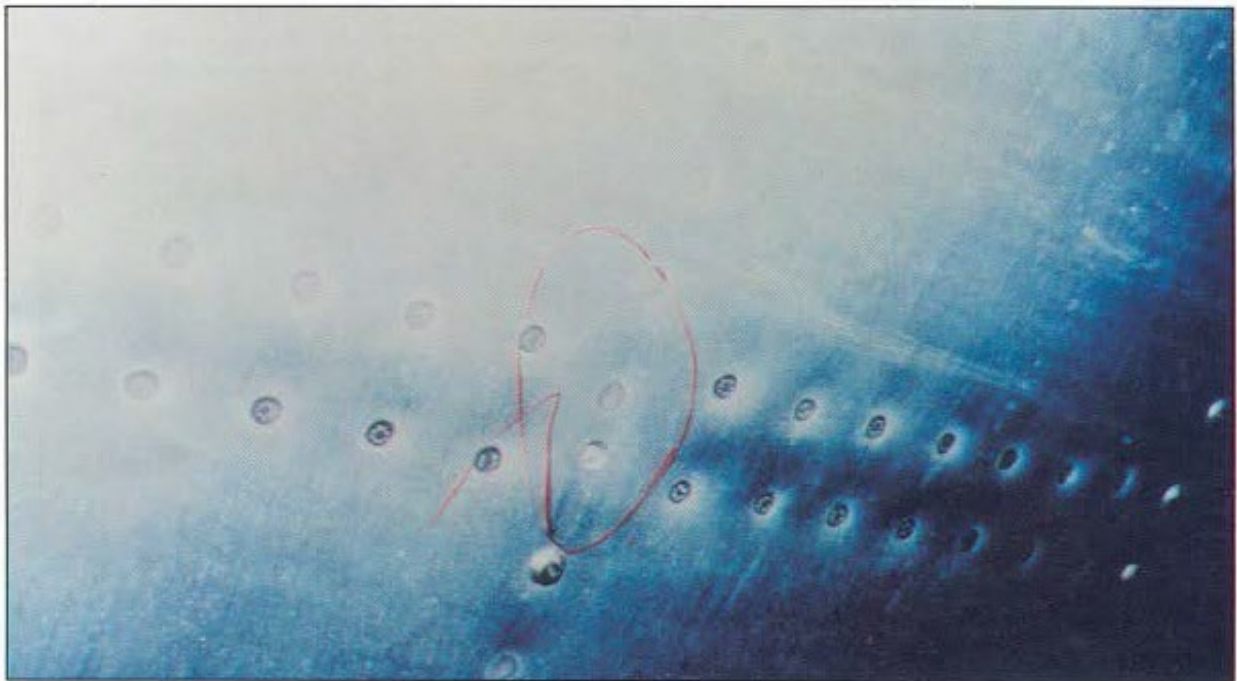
Skin Bulging Around Fasteners Caused by Pressure from Corrosion Products
